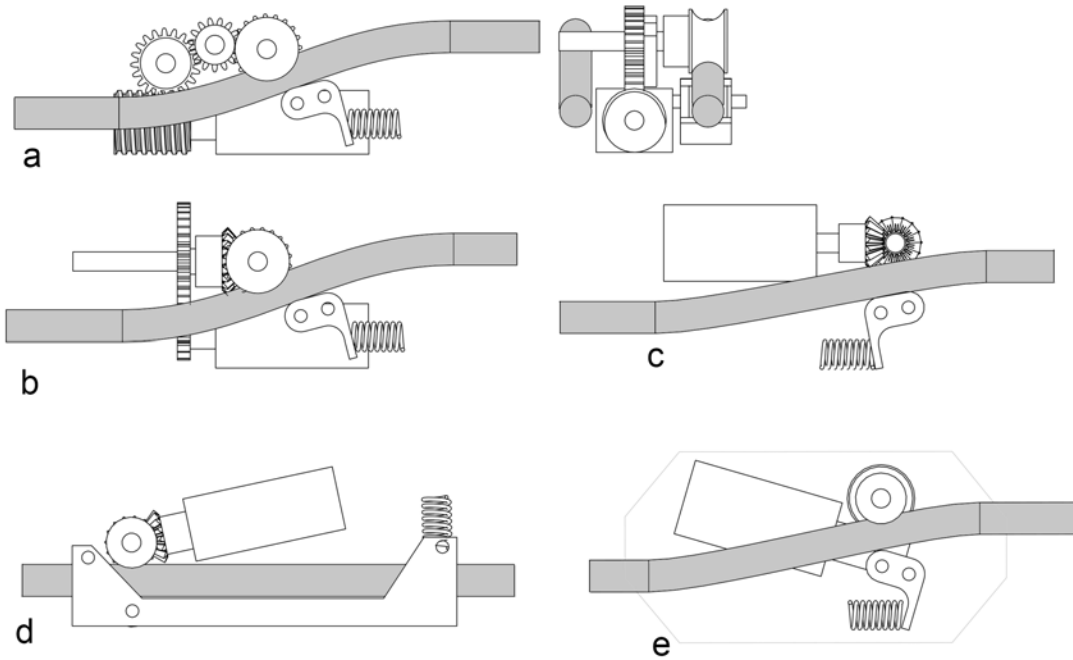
Different cable feed designs; all designs use a transmission to create a right angle between shafts. a: worm gear, b: bevel gear and spur gears, c: bevel gears, d: bevel gear, e: crossed helical gears.
